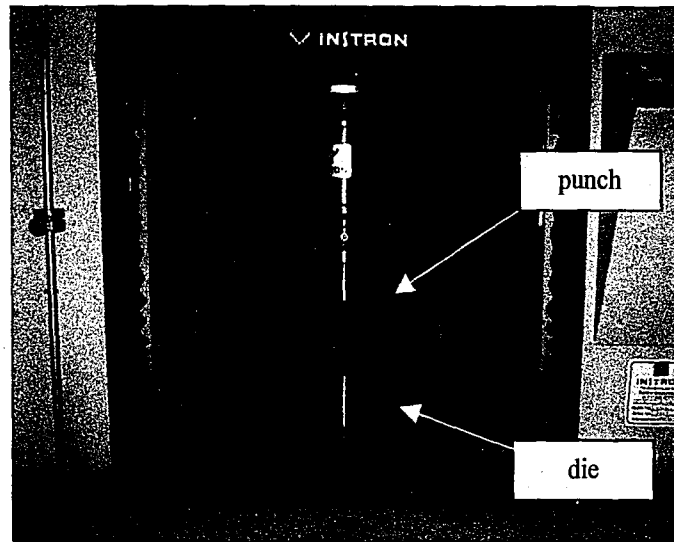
Extrusion set up on Instron tensile testing unit.
